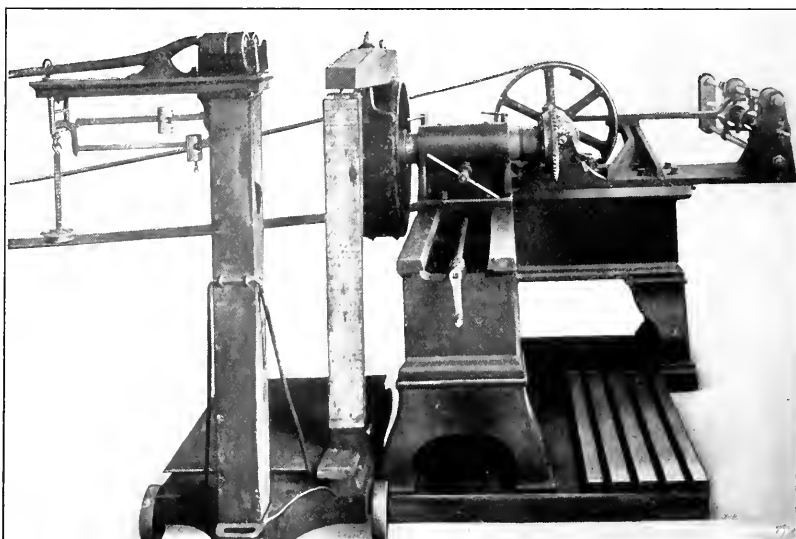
Machine used for testing End Thrust of Spiral Bevel Pinions
